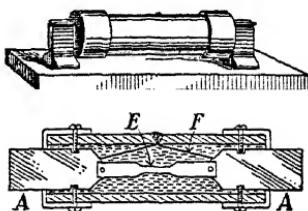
A cartridge fuse. The complete fuse inserted in the circuit is shown above, a longitudinal section below. A, A, contact strips of copper; E, fuse wire; F, a wire which chars the casing when the fuse melts.
